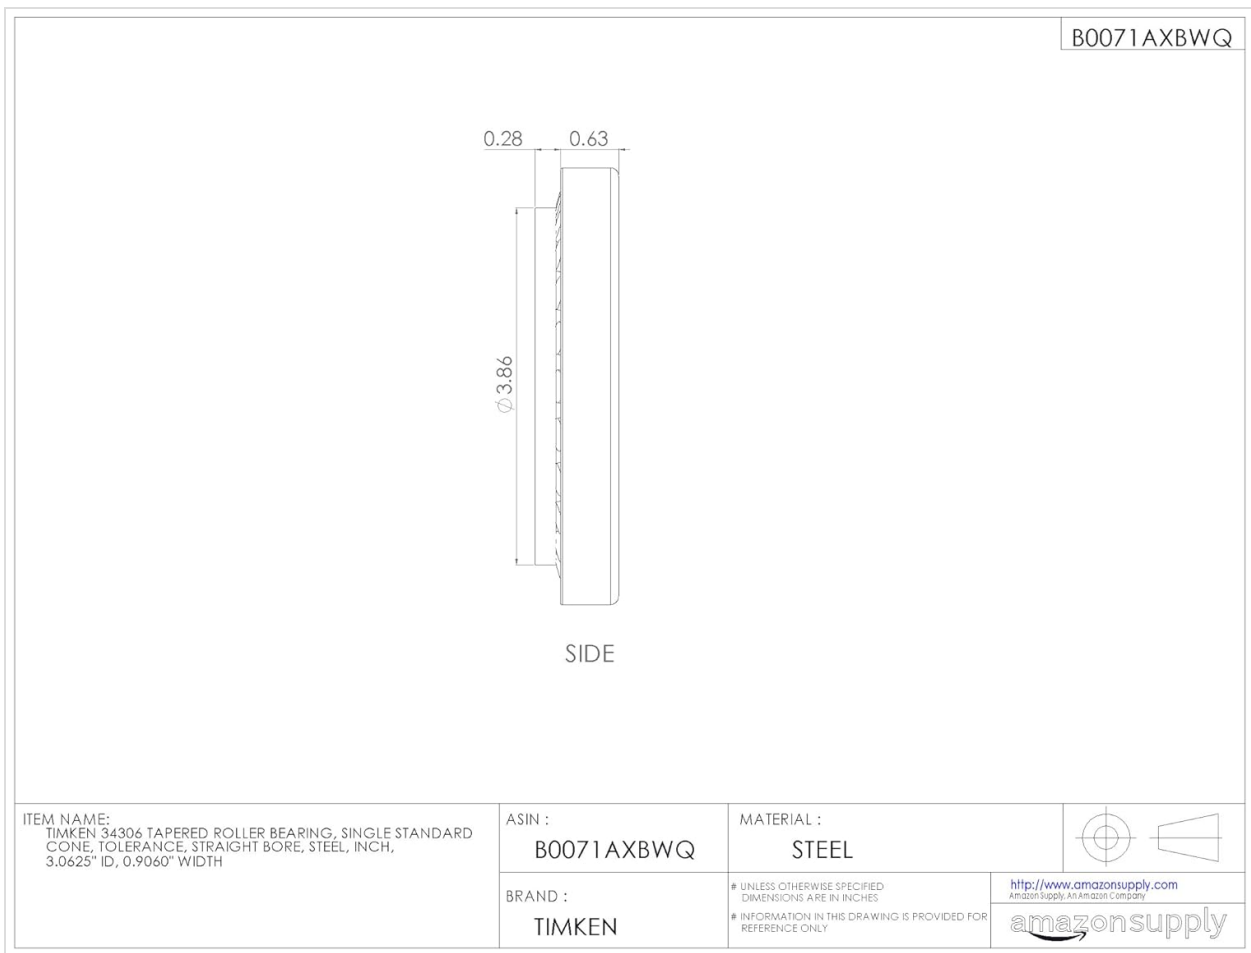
Side view technical drawing of the Timken 34306 Tapered Roller Bearing, illustrating its profile and width.
